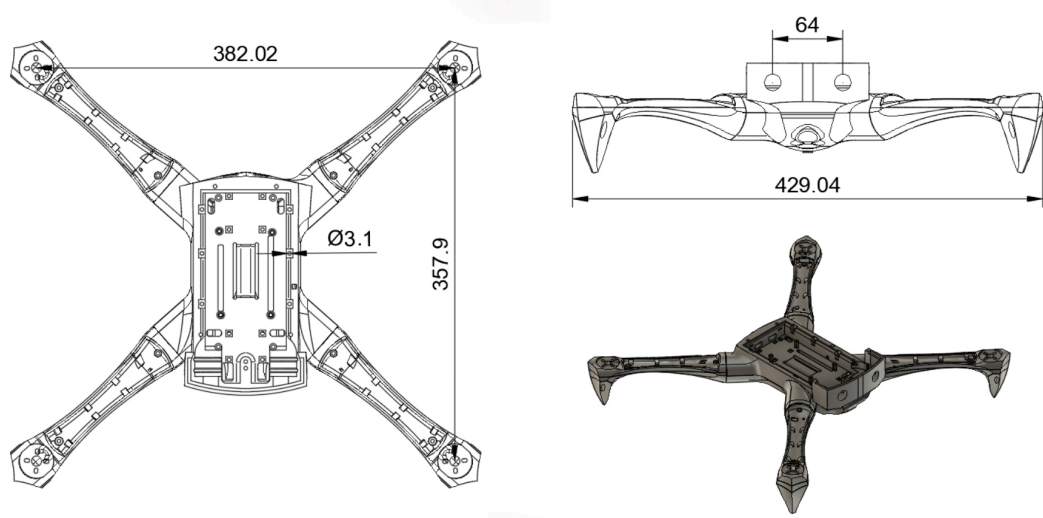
Drone dimensions specified in millimetre, all boltholes are for M3 bolts
